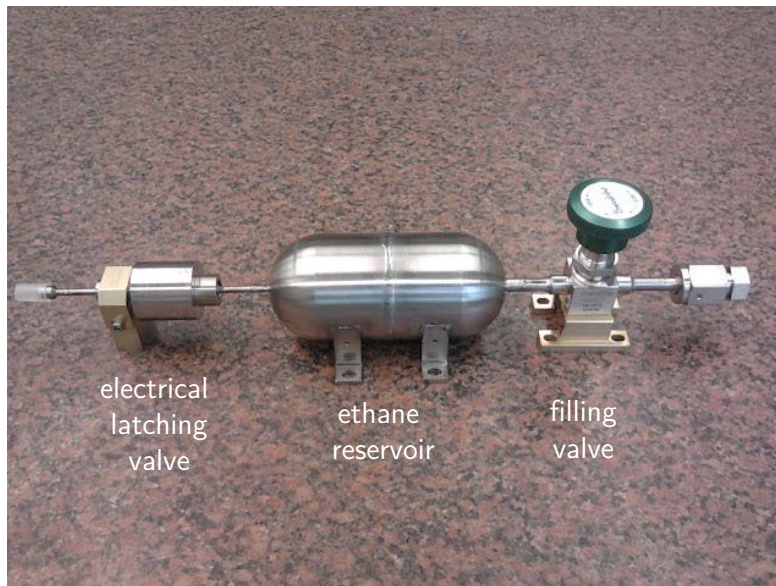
Manufacturing of the sVCHP valve complex. Leakage test after each welded joint.
